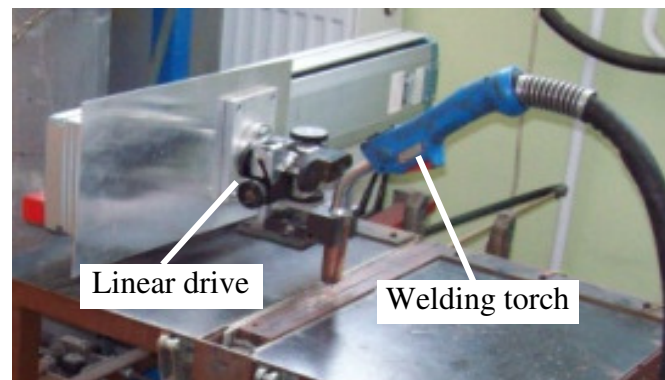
The automated assembly with the welding torch and linear drive
